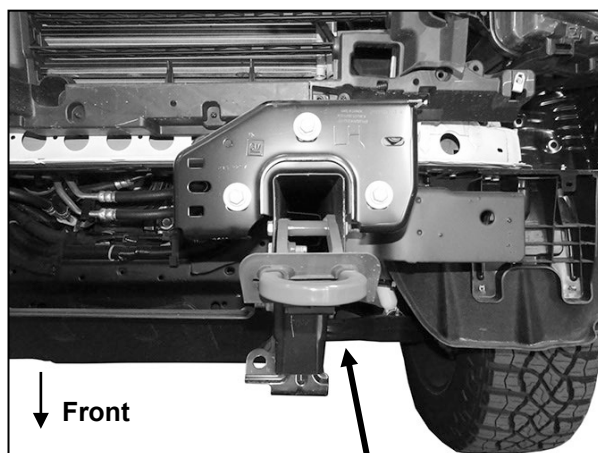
Remove top bumper bolts to remove bumper, (arrows). Driver/left side pictured
